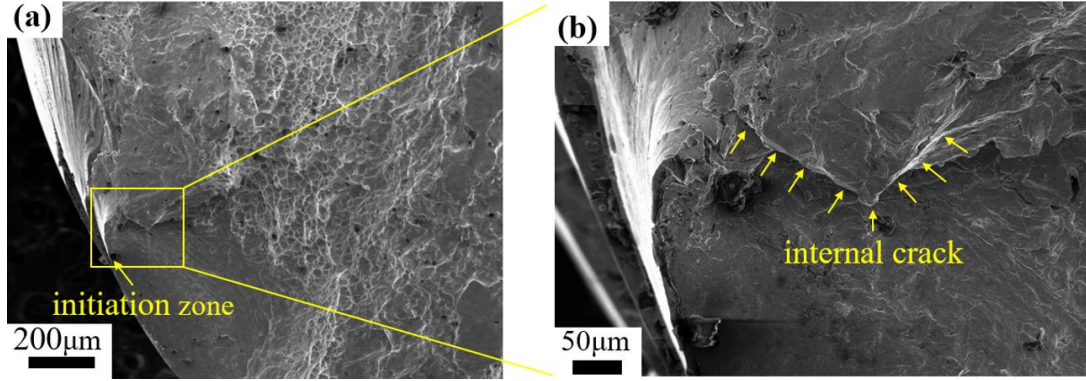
The fatigue fracture surface of condition H DSS sample broken in 87.215 cycles, at 95% of σ_{yield} (a) crack initiation zone, (b) internal crack.
